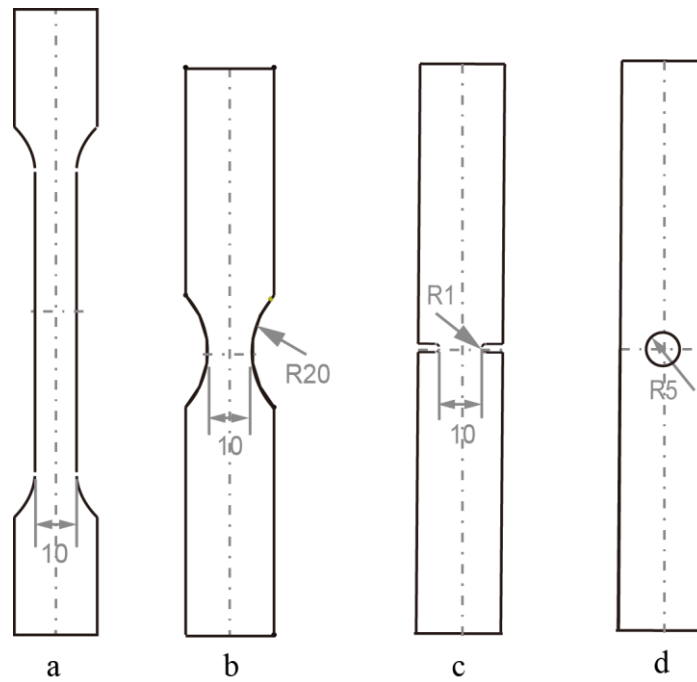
Illustrative examples of (a) smooth, notched tensile specimens with a circular cutout of (b) 20 mm and (c) 1 mm, and (d) tensile specimen with a central hole.
